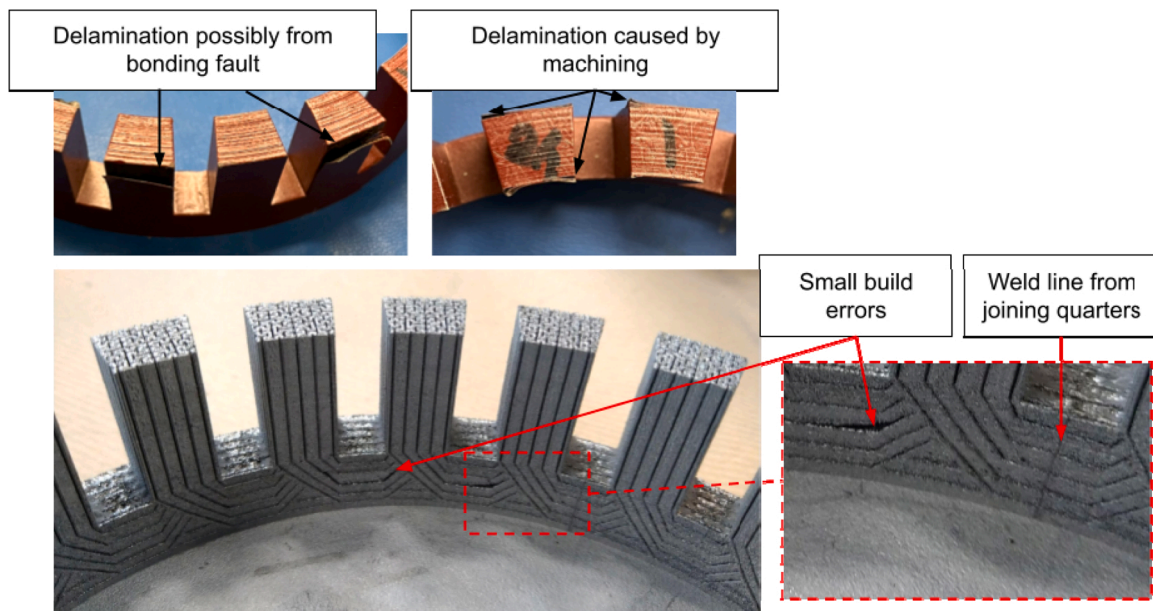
Delamination from bonding and machining showed for the 0.127 mm laminated stator, and build defects of the AM Hilbert stator showing a weld line from splitting the component into four segments, and small errors where the geometry is not exactly as intended.
